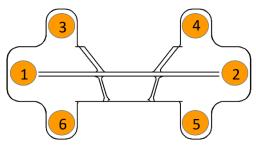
Sequential spot welding sequence for clip-skin-stringer joint
